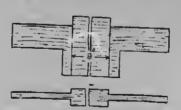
Edge View and Side View of Washstand Bottom Rail.
